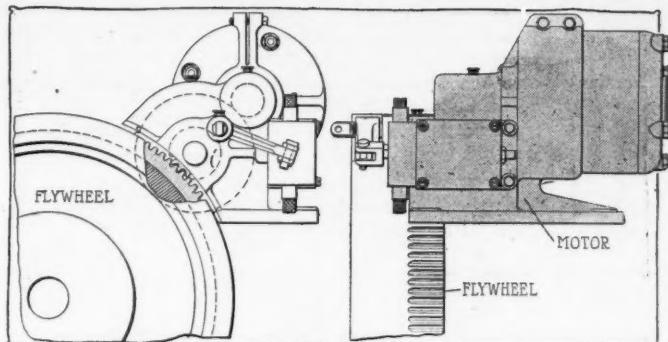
Mounting of the Elyria-Dean cranking motor on flywheel of engine
